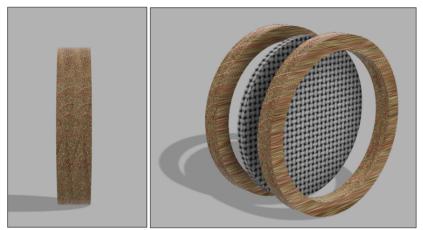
Side and exploded view of 30mm sample holder setup for flat fabrics.
